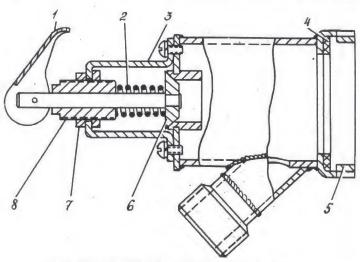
SAFETY VALVE AND EXHAUST OFFTAKE 1 - lever; 2 - spring; 3 - body; 4 - gasket; 5 - cap; 6 - valve; 7 - nut; 8 - bushing
